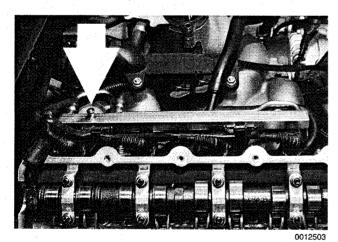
Fuel rail showing location of Schræder valve fitting on M44 engine (arrow).
